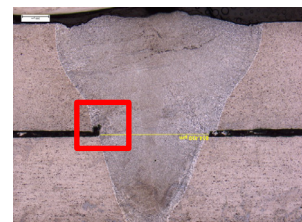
Voids in the weld bead at the interface of two Al sheets
